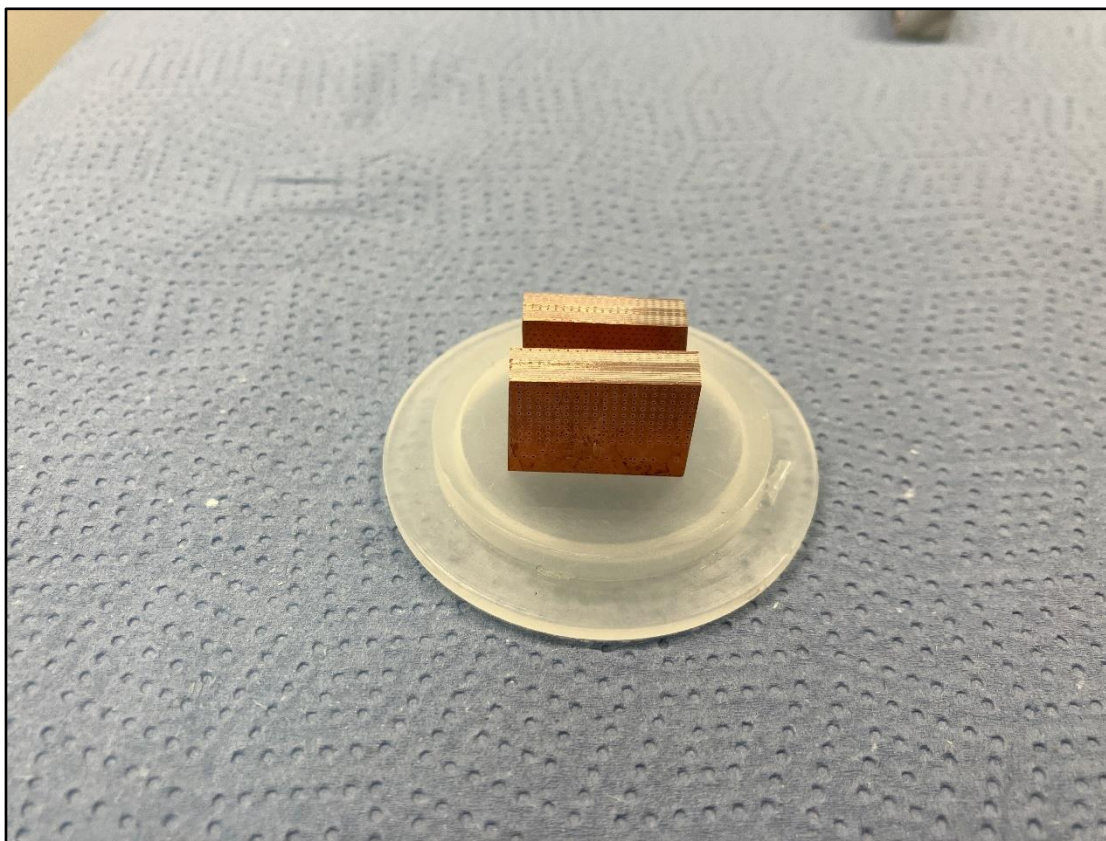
Two PCB parts are on the bottom of the cold mounting mold.
